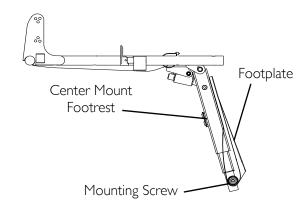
Adjusting the Tension of the Flip Up Footplate
